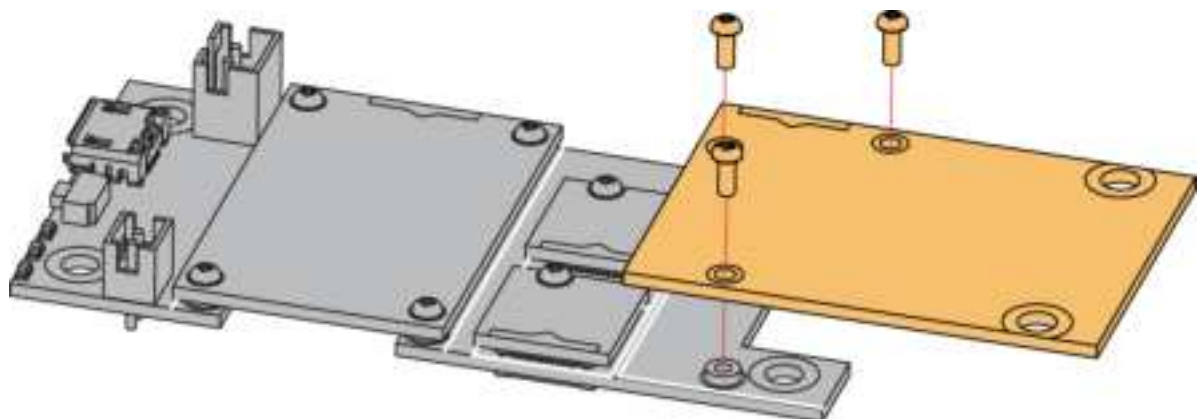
RAK13300 WisBlock LPWAN Module Mounting
